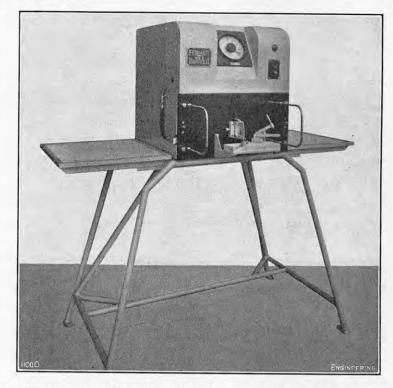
ROCKFORD PLANER; ROCKWELL MACHINE TOOL CO., LTD. FIG. 125. UNIVERSAL WORKHEAD; WILD-BARFIELD ELECTRIC FURNACES, LTD.
